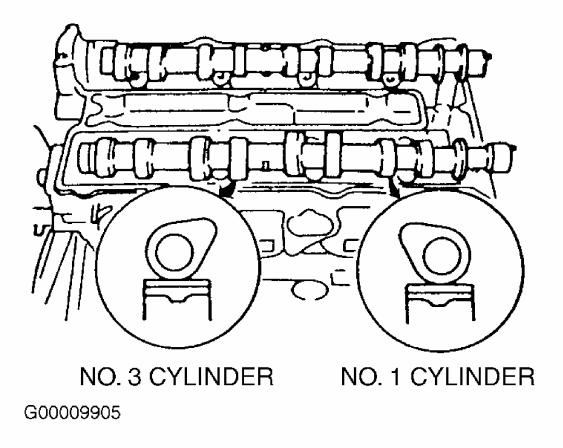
Positioning Camshaft Lobes Courtesy of MAZDA MOTOR CORP.
